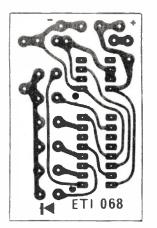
Printed-circuit board layout for the LED dice. Full size 55mm x 35mm.
